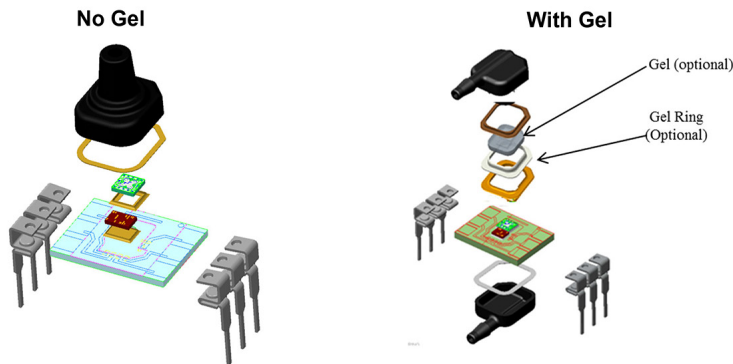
Manifold Mount Designs for Assembly Pressure – ABP2 Series Examples
